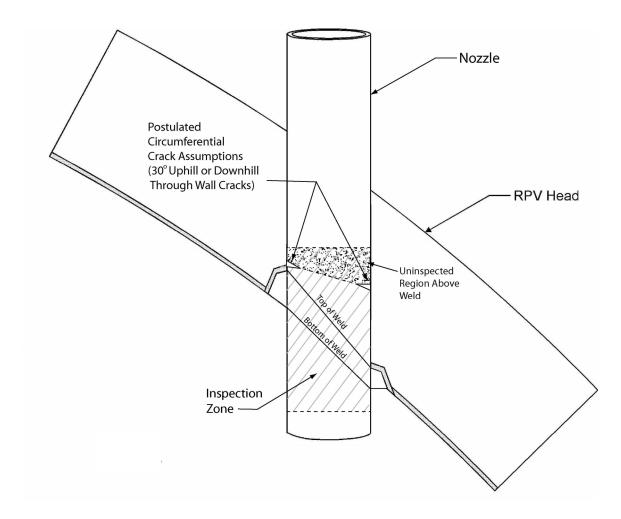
Circumferential Flaw Assumption for Uninspected Region above J-Groove Weld
